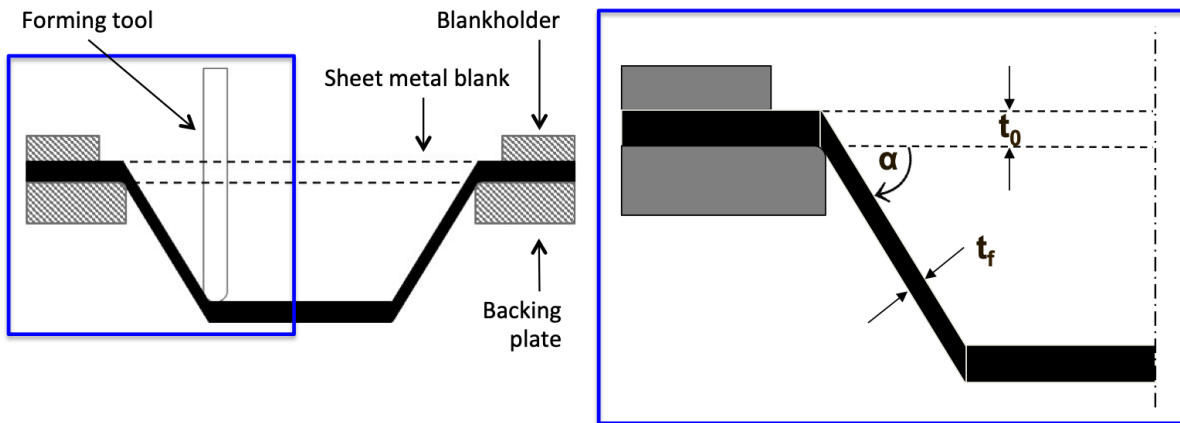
Schematic of the ISF process. The sheet metal blank is clamped between blankholders and deformed with the forming tool. t_0 is the initial sheet thickness, t_f is the formed sheet thickness and α is the forming angle.
